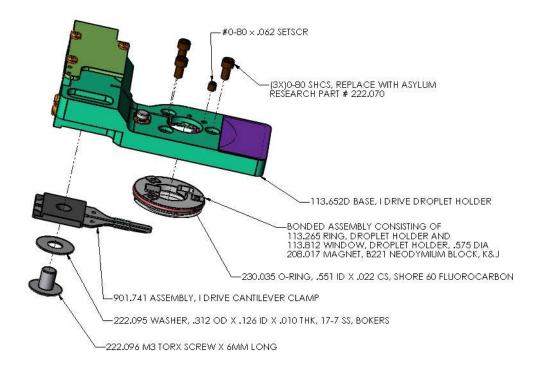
Droplet Cantilever Holder Assembly exploded view
